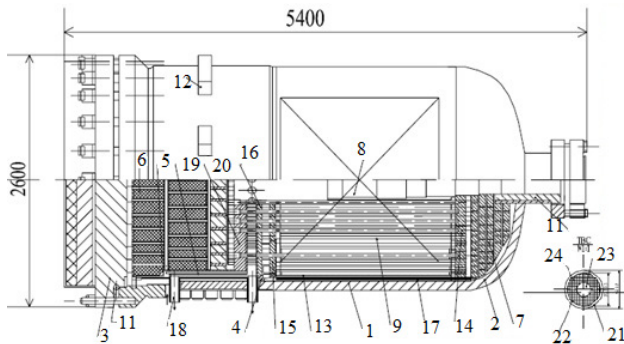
Design of high temperature gas-cooled reactor. 1-vessel; 2 – bottom; 3 – closure head; 4 – core shield; 5 – fuel assemblies holder; 6 – upper shield; 7 – edge shields; 8 – target; 9 – core; 10 – nozzle of ion guide; 11 – sealing; 12 – reactor vessel fixing elements; 13 – core shroud shell; 14, 15, 16 – core plates; 17 – shield; 18 – output gas nozzle; 19, 20 – fuel assemblies holder shell, plate; 21, 22, 23 – fuel assemblies’ tubes; 24 – cylindrical fuel elements.
